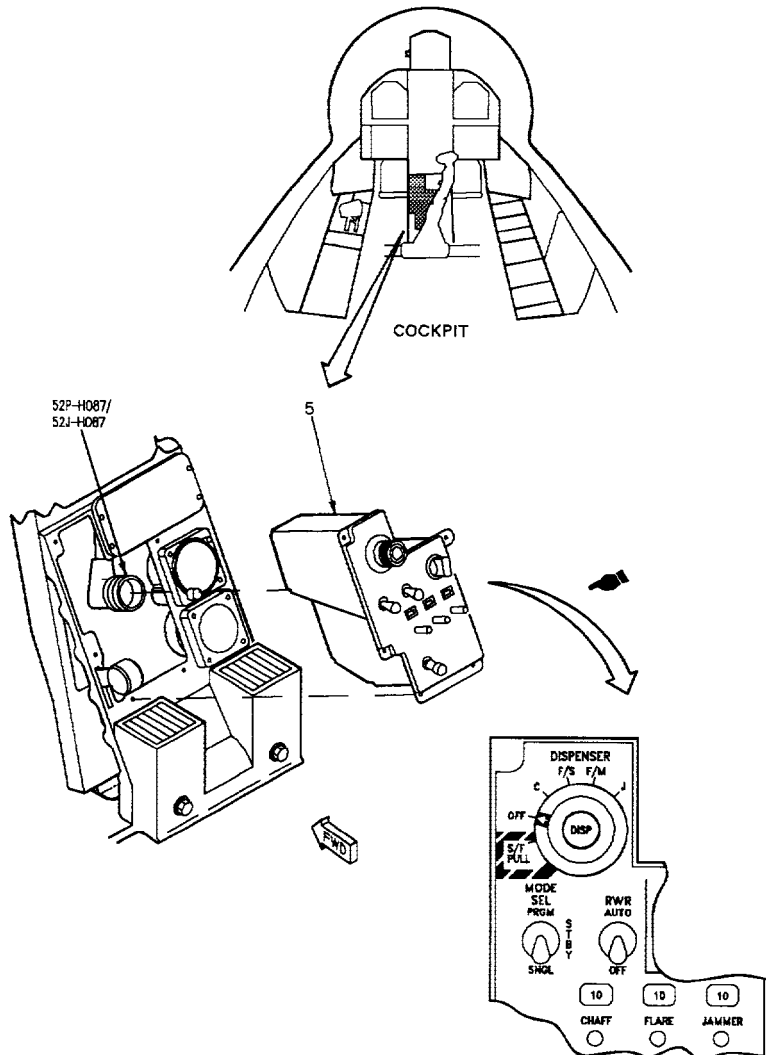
Countermeasures Dispensing System Locator (Sheet 2)
